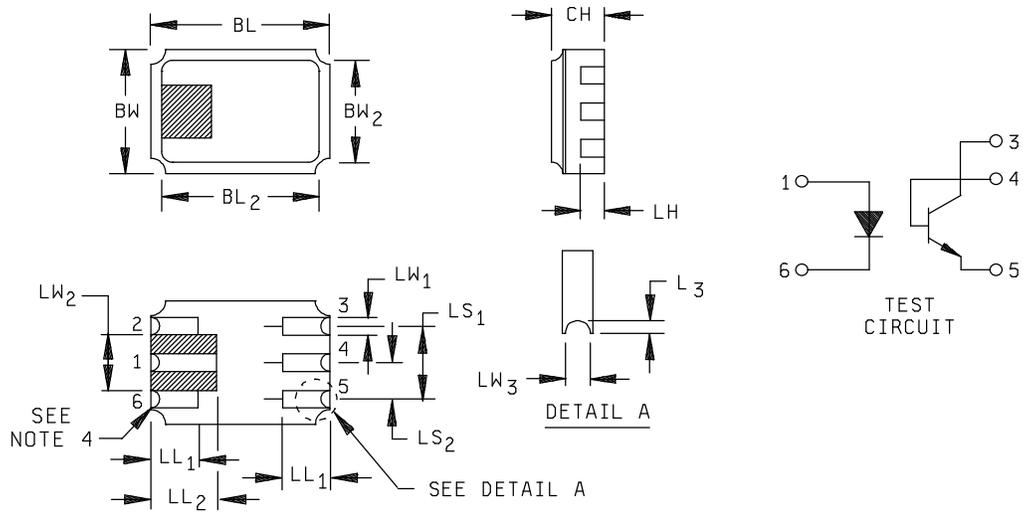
Physical dimensions and configuration, surface mount devices.
